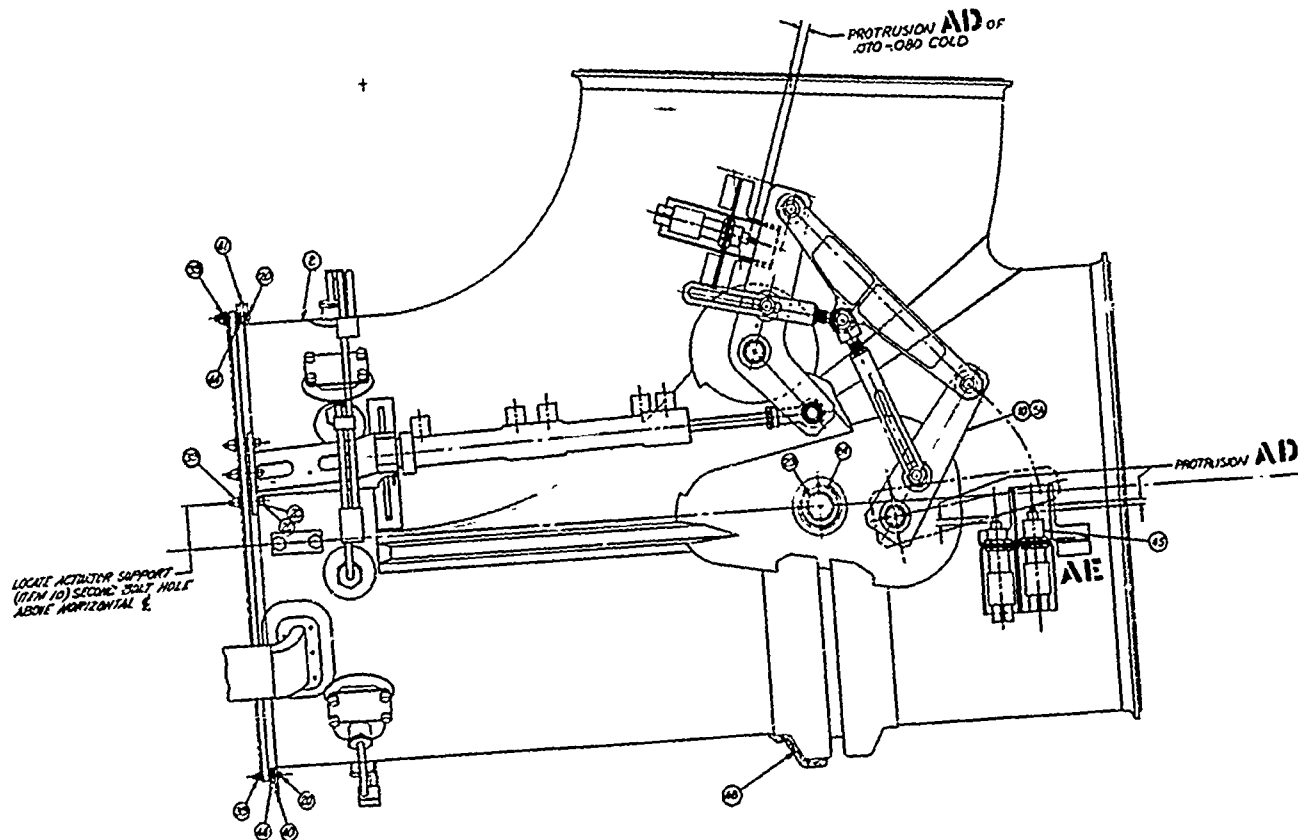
A ASSEMBLY DRAWING, RIC DR
